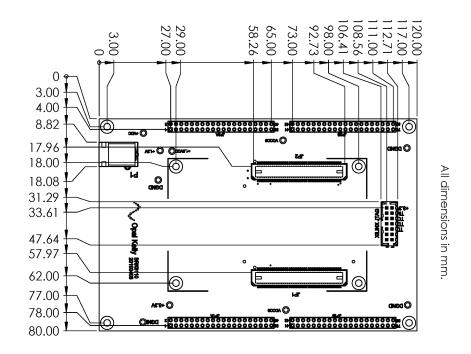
Drawing of BRK6110 – the expansion board of OpalKelly XEM6310-LX45 [3].
